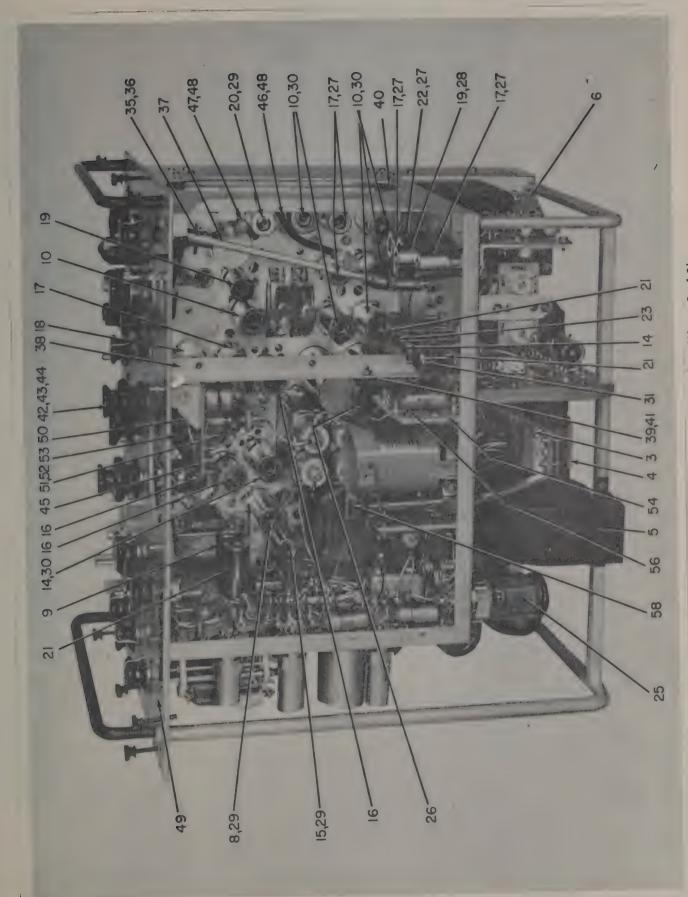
Pulse Generator Assembly, SG-30/UP (Sheet 1 of 3)
